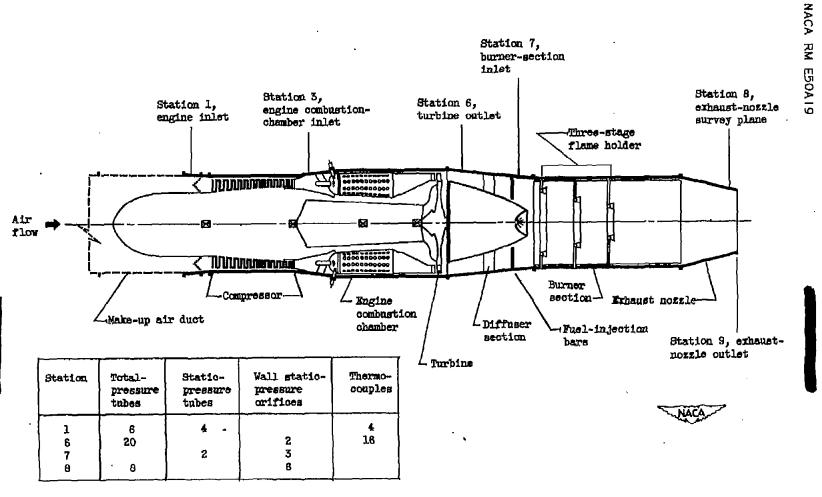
Cross section of tail-pipe-burner installation showing stations at which instrumentation was installed.
